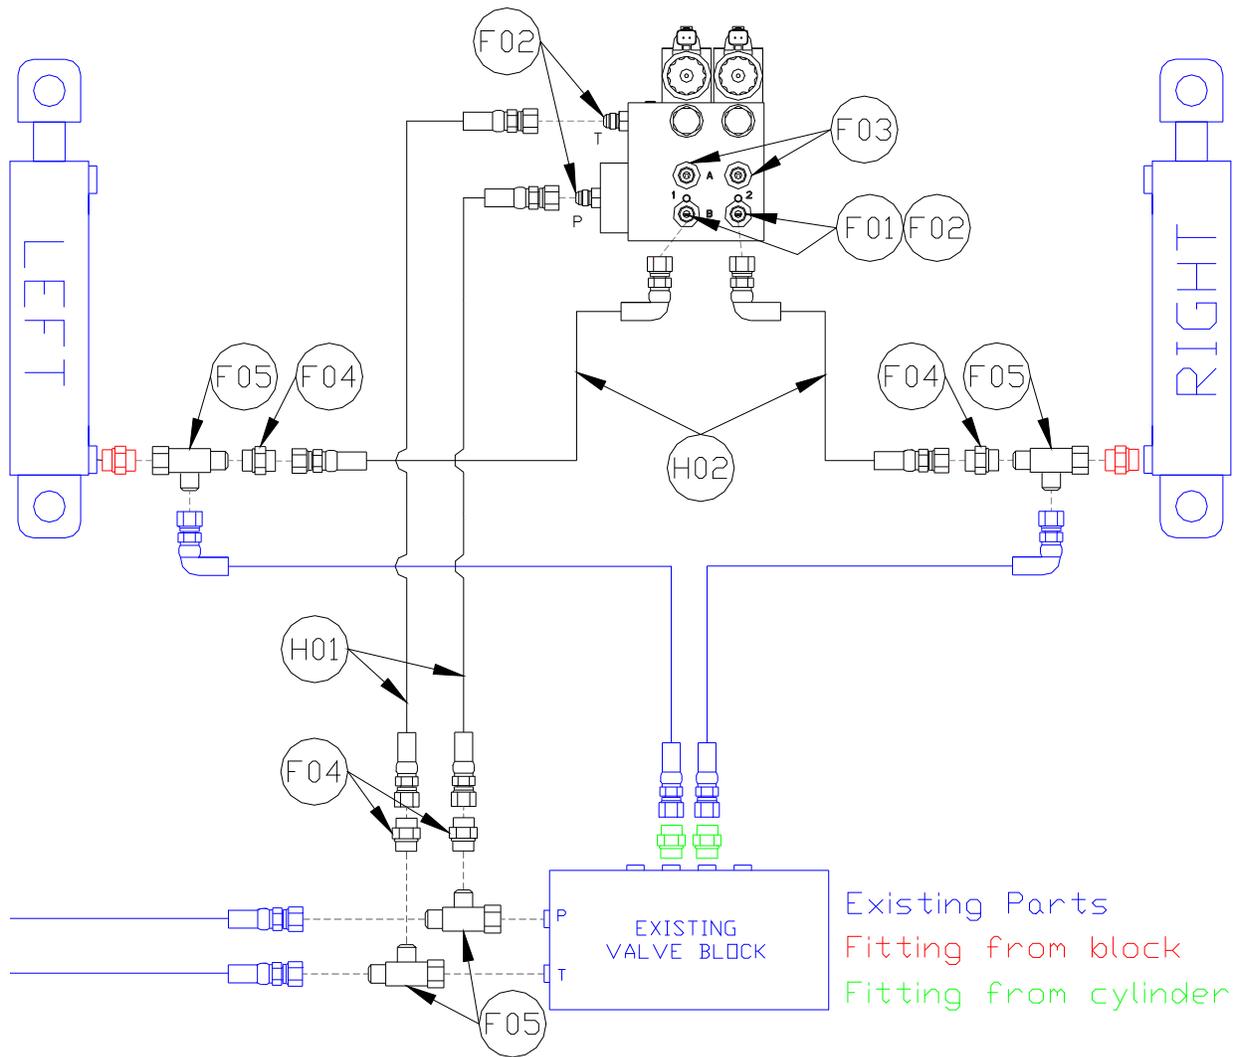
Hydraulic Plumbing: Single Acting (Force Boom)
